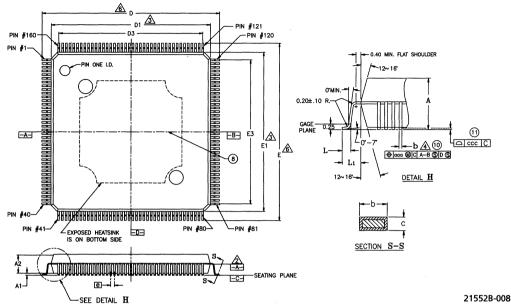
160-Lead Square Metric, Cavity-Up Package with a Heat Sink (PQE)
